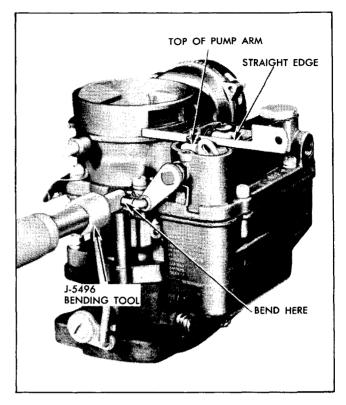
B-34 Accelerator Pump Adjustment—Carter
